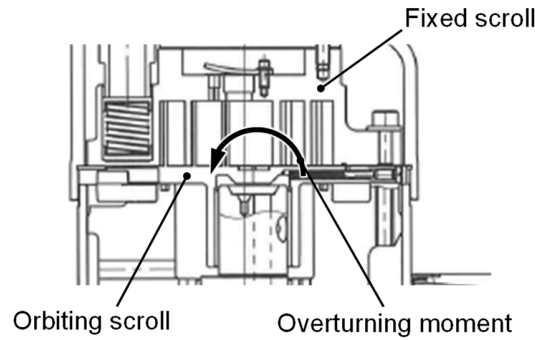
Schematic view of thrust slide bearing of scroll compressor
